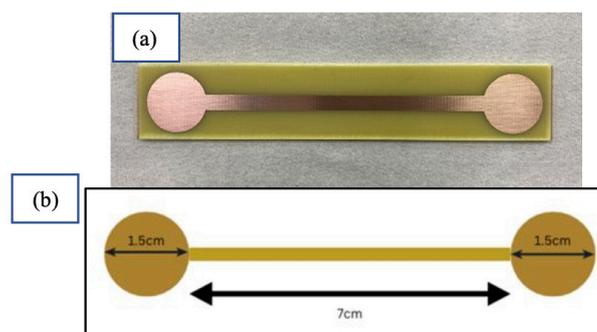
(a) Real figure of PCB substrate and (b) illustration design and dimension of the copper PCB substrates.
